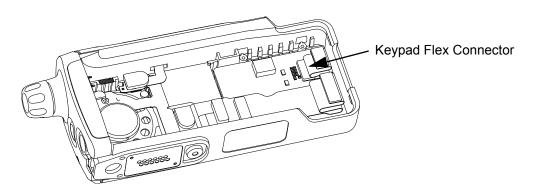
Rest the Front Kit Flex and plug in the Keypad Flex Connector
